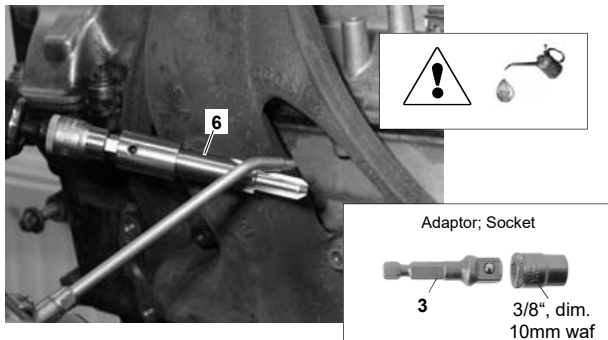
Drilling up the glow plug top connector to pilot hole Ø.
